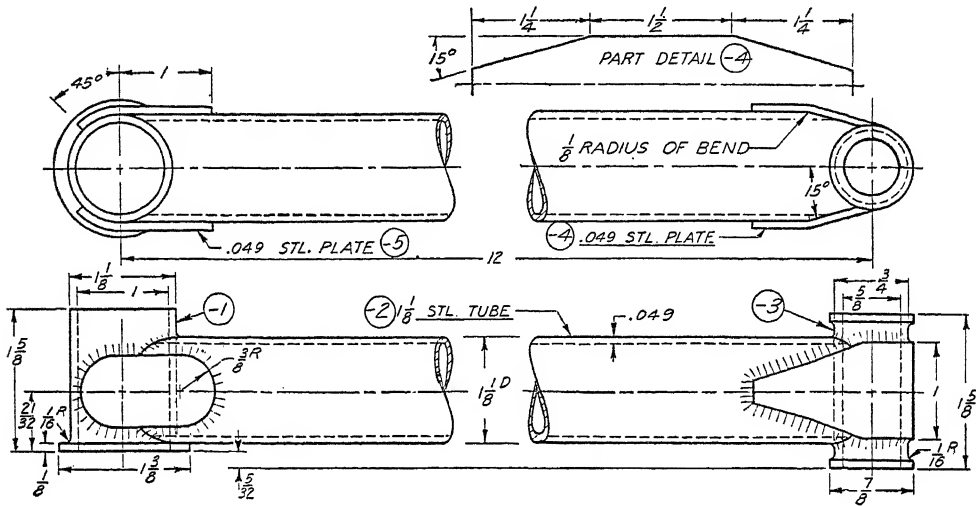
Weld Assembly. Prob. 12-20.
